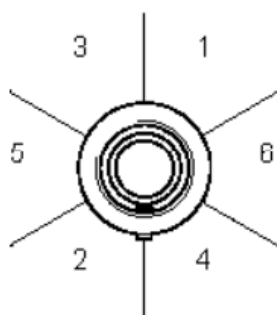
Welding must be done in 6 sequences as shown here.
